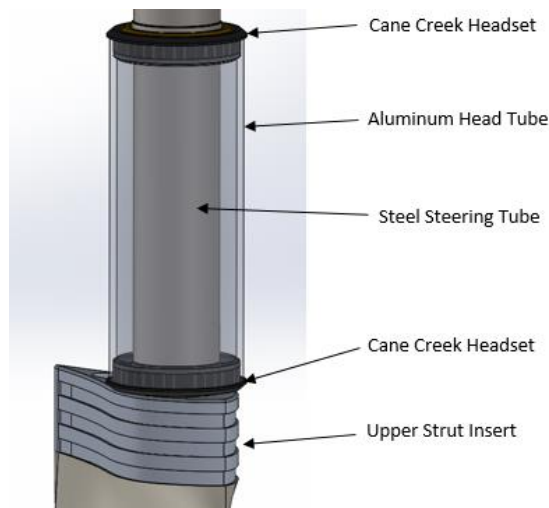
Strut Mount Assembly with headsets and steering tube mounted into the head tube
